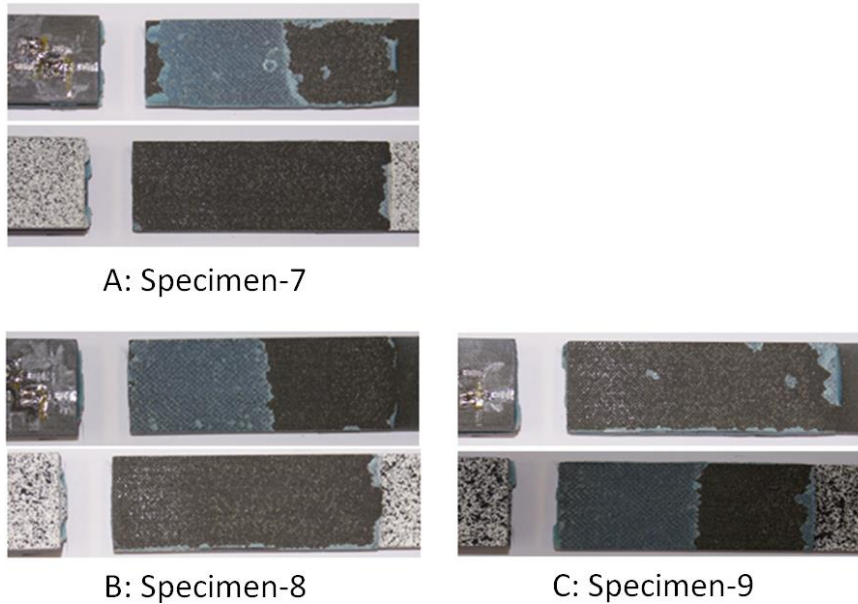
RSG Array C test samples. Adhesive surfaces post testing.
